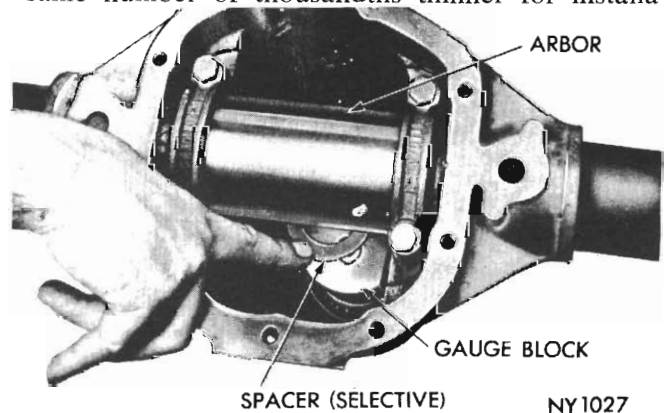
Checking housing for pinion spacer thickness using Tool E3C10E — typical view.
